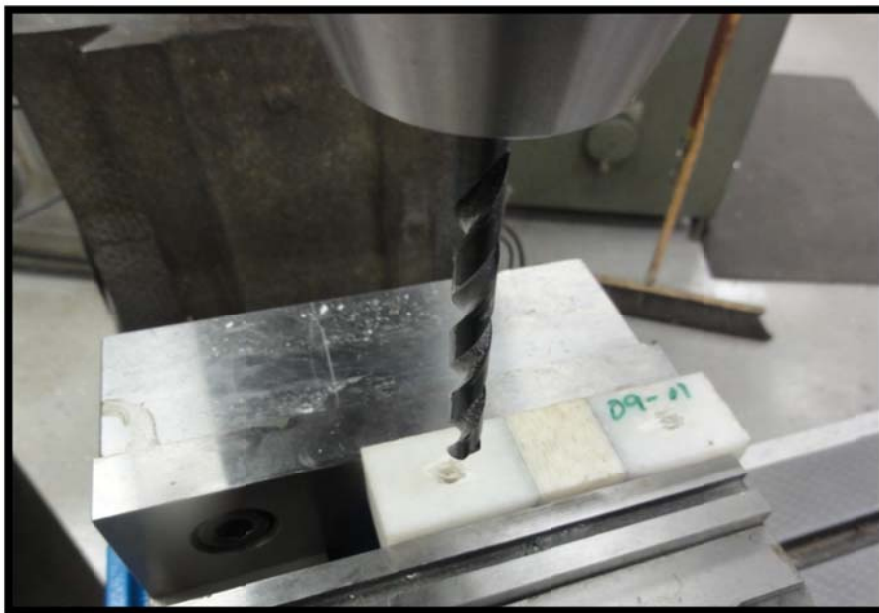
Holes Drilled in End Tabs to Connect to Test Fixture using Bridgeport Mill
